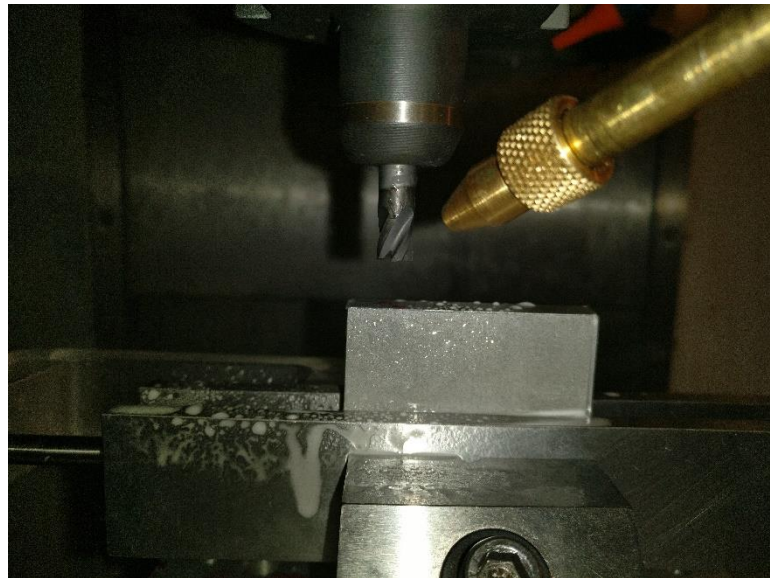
AlSiC_p sample and CVD diamond coated end mill secured with Kool Mist coolant nozzle aimed at the cutting edges.
